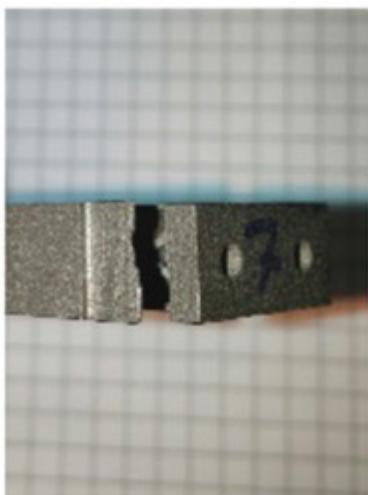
Early fatigue failure of poorly manufactured flexure
